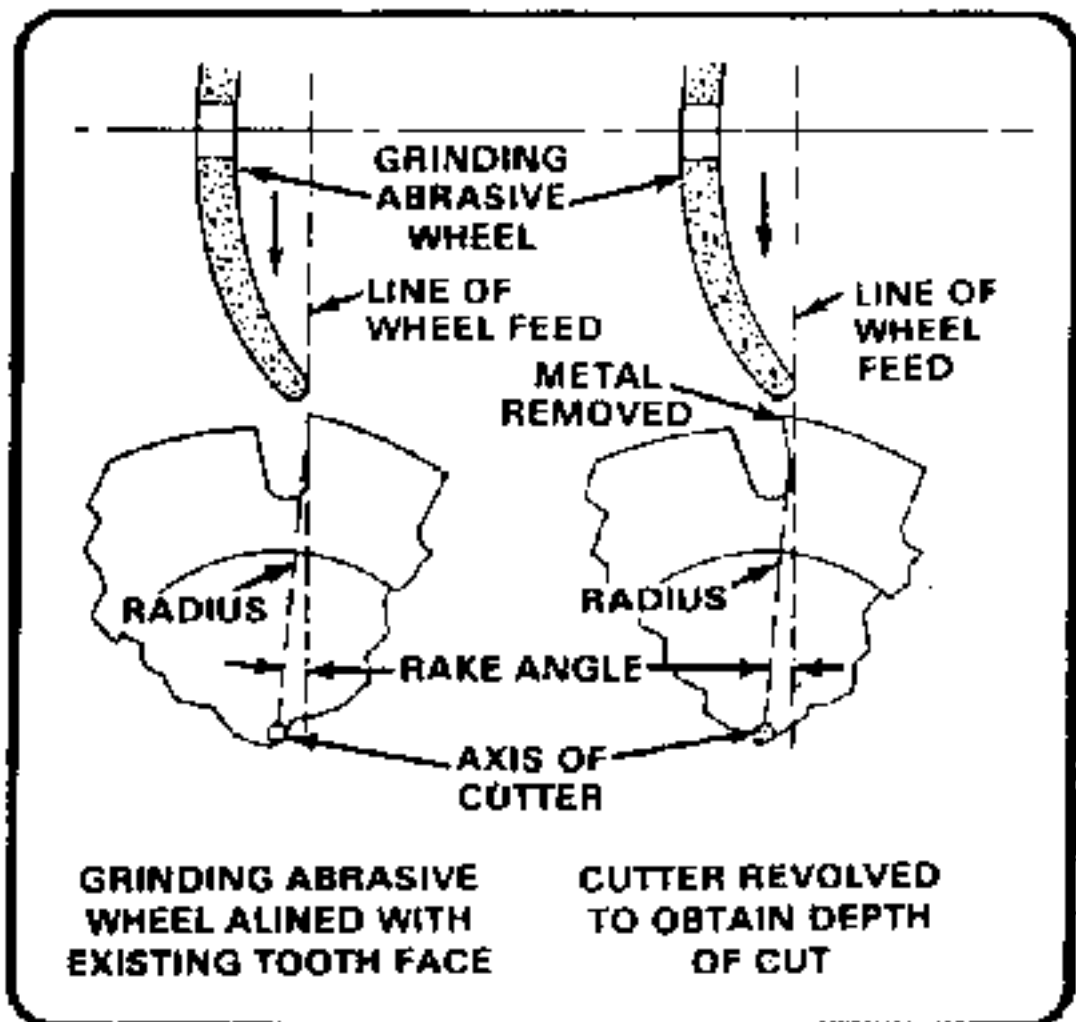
Aligning formed milling cutter and grinding wheel.
